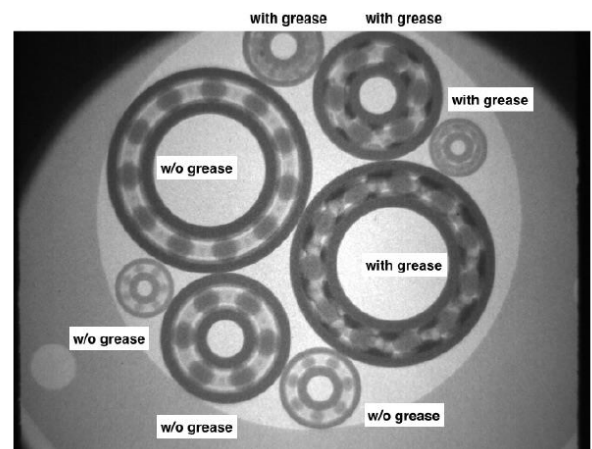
Neutron radiography image of the bearings. Half of these bearings are removed the grease.
